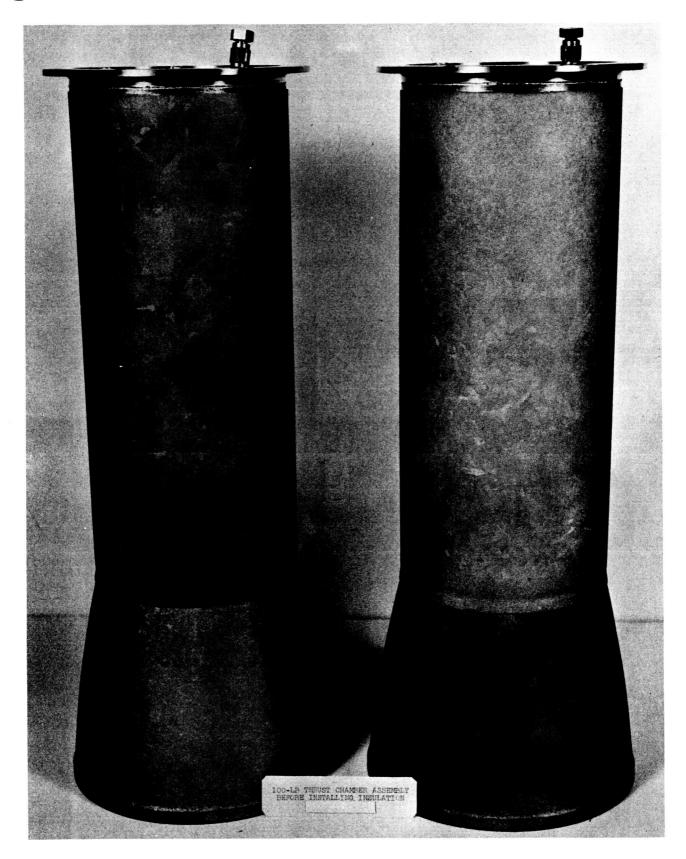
100-lb Thrust Chamber Assembly Before Installing Insulation
